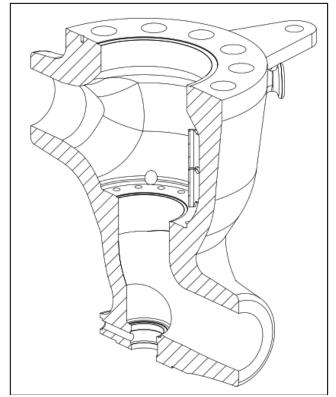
MSCV Casing Replacement – Isometric View (Cross Section)
